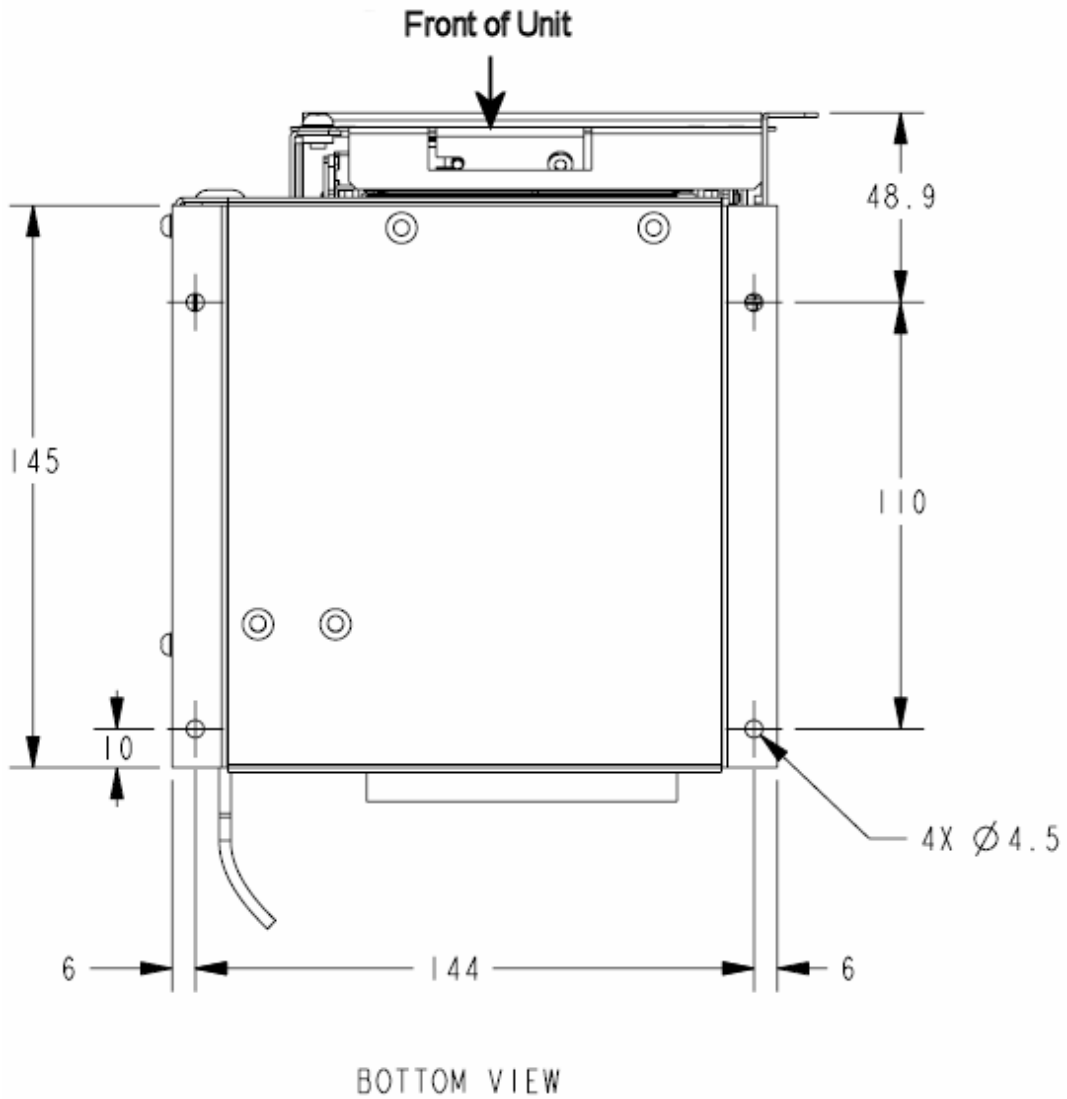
Mechanical Dimensions - High Speed Kiosk Vertical Bottom View
